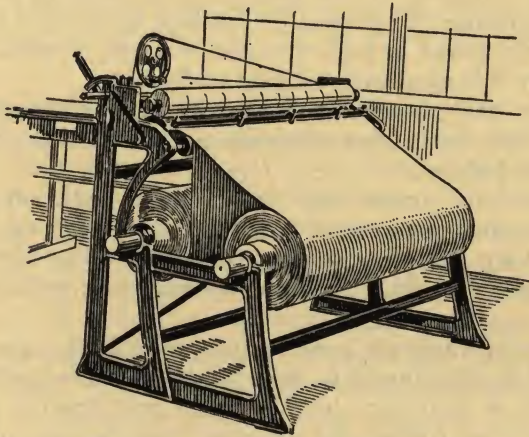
Cummings two-roll, film-cutting machine.
